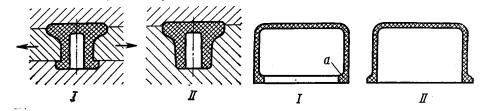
Improper (I) and proper (II) shapes of control knob (shape I requires a mould with retractable sides)
